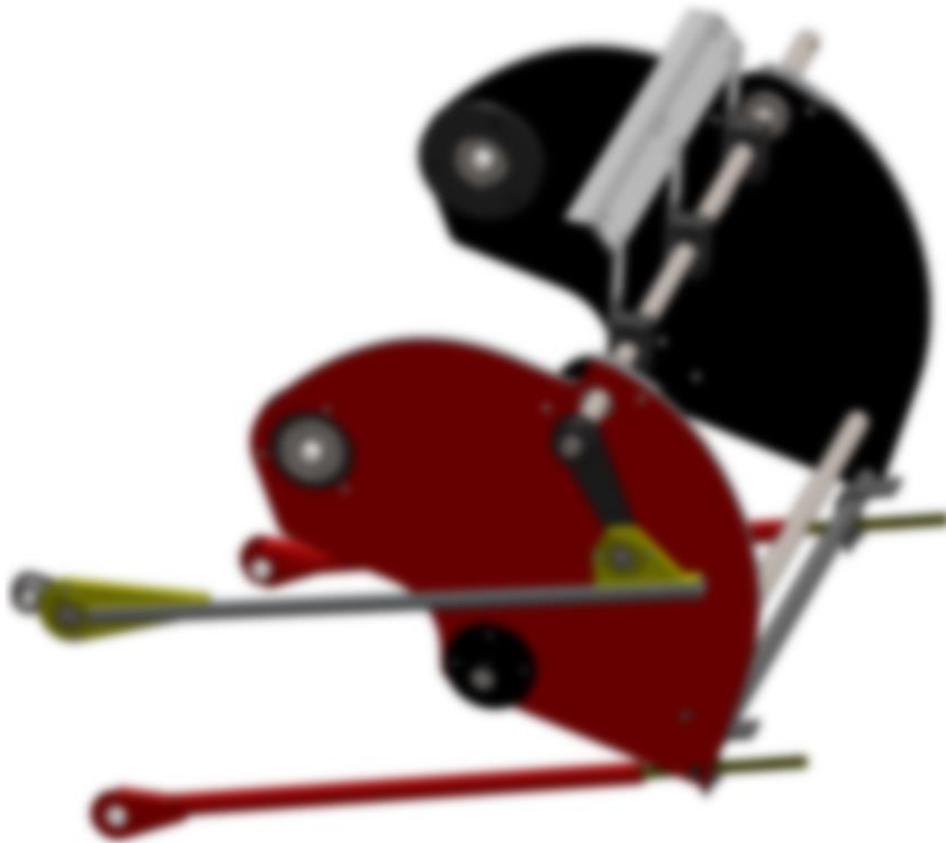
3D Drawing of The Stripping Mechanism
